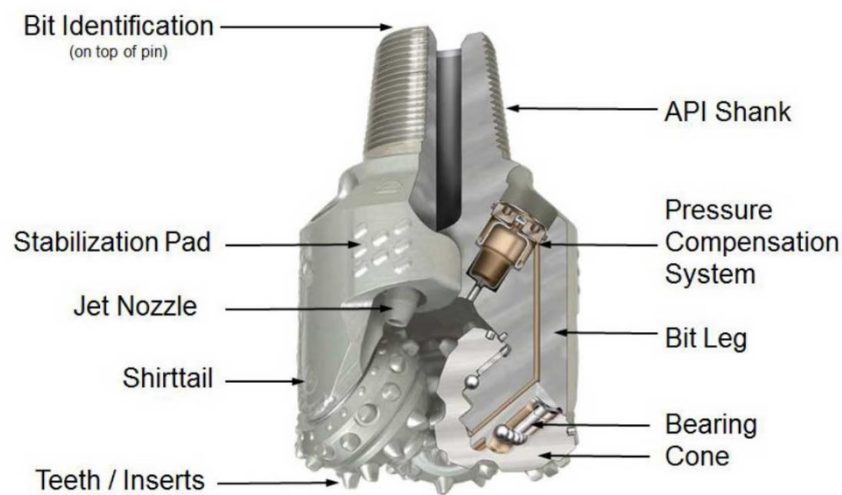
3 - Tricone bit assembly (Taken from : <https://firmtechco.com/pdc-vs-tricone/>)
